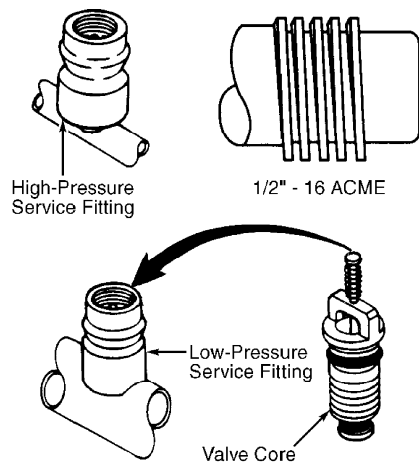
Identifying R-134a Fittings & Quick-Connect Service Couplings
